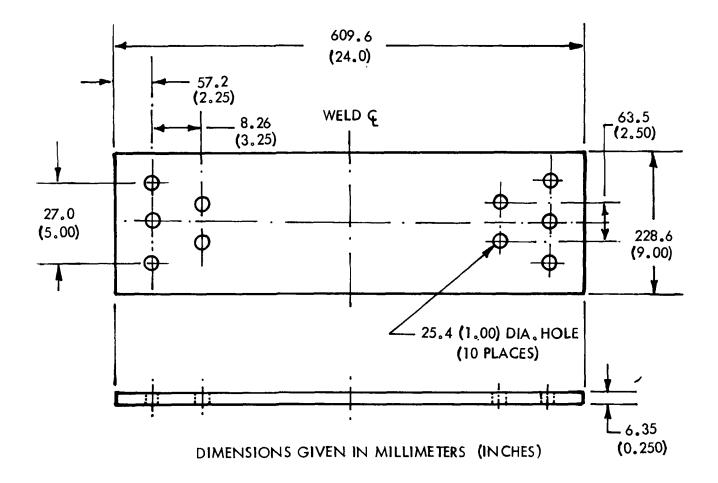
ALUMINUM WELD METAL SURFACE FLAWED SPECIMENS
